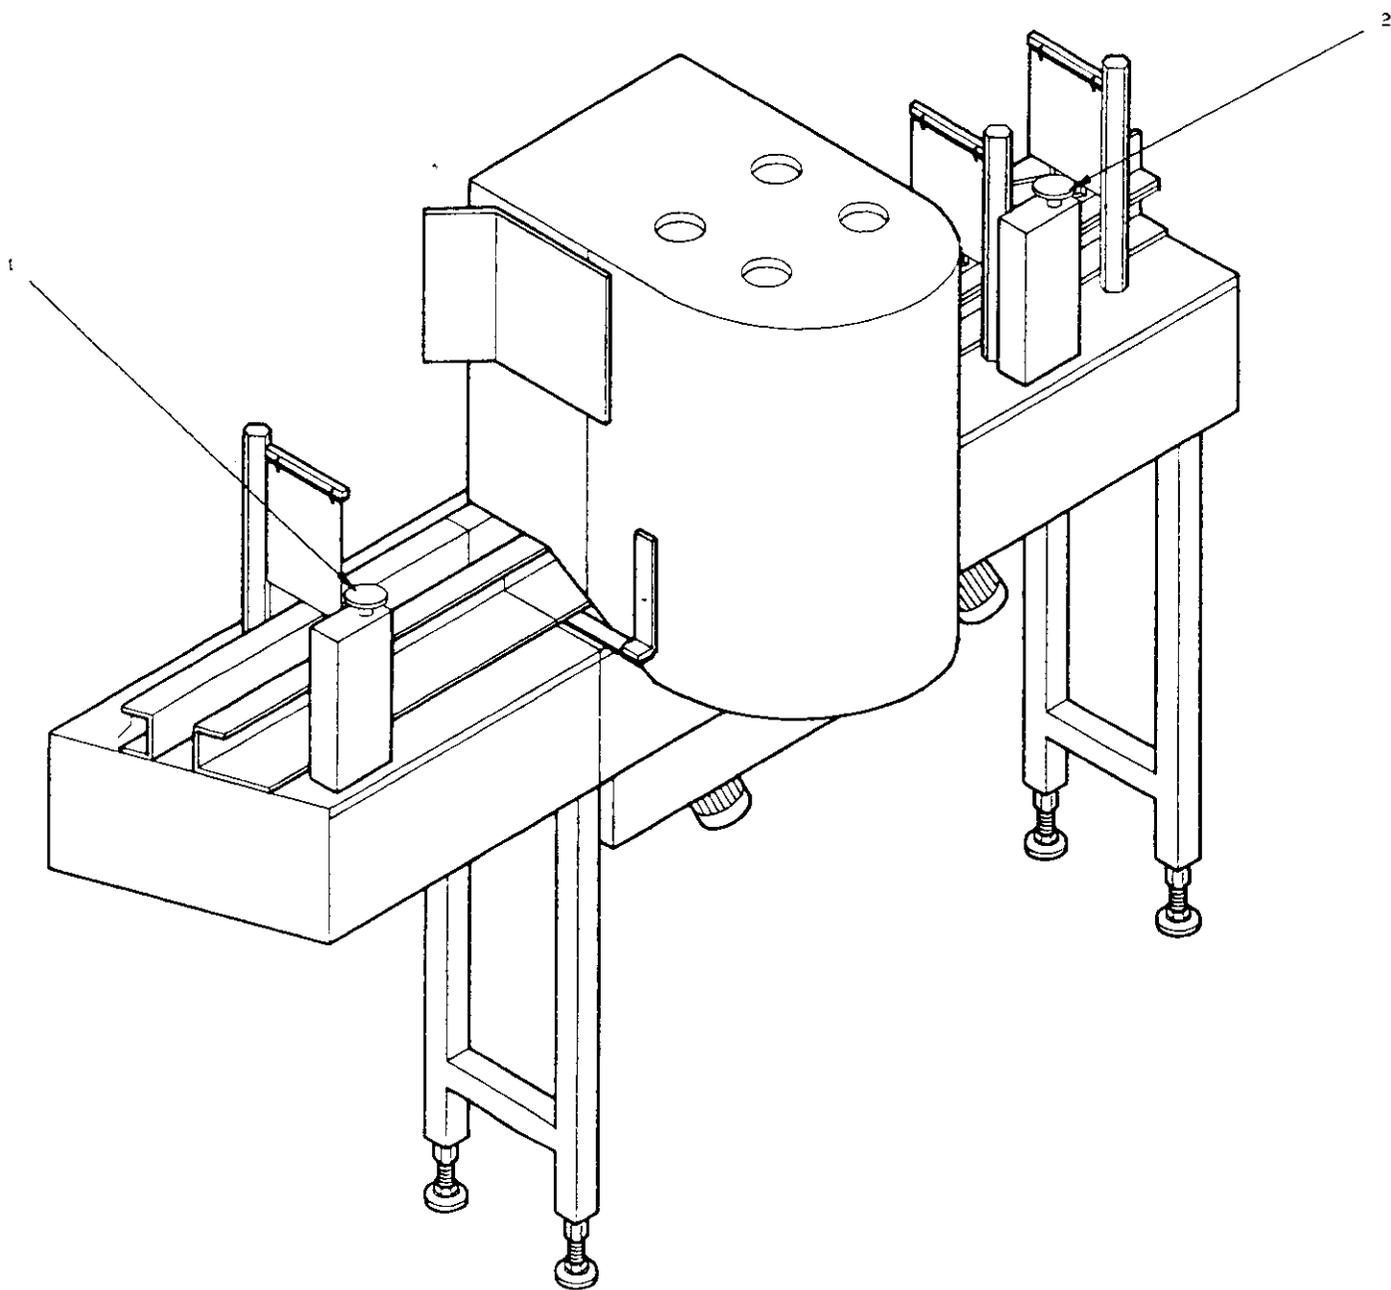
Unit 7 Flats Extractor Controls and Indicators
